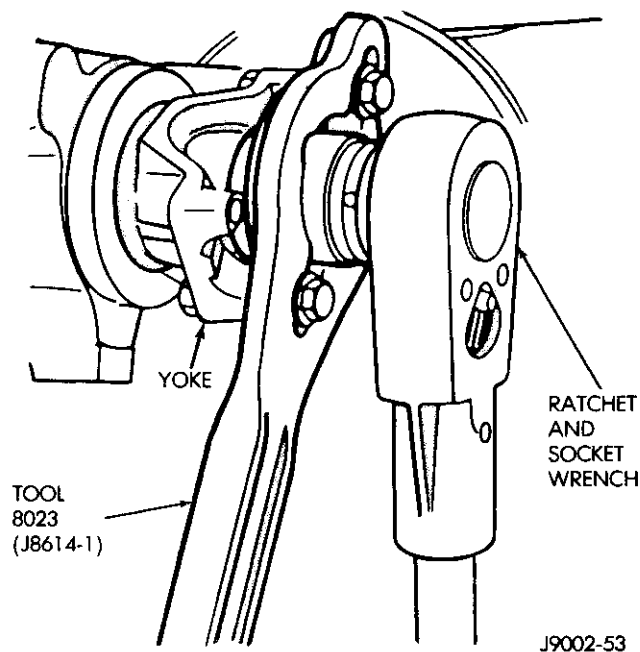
Pinion Shaft (Axle) Yoke Nut Removal
